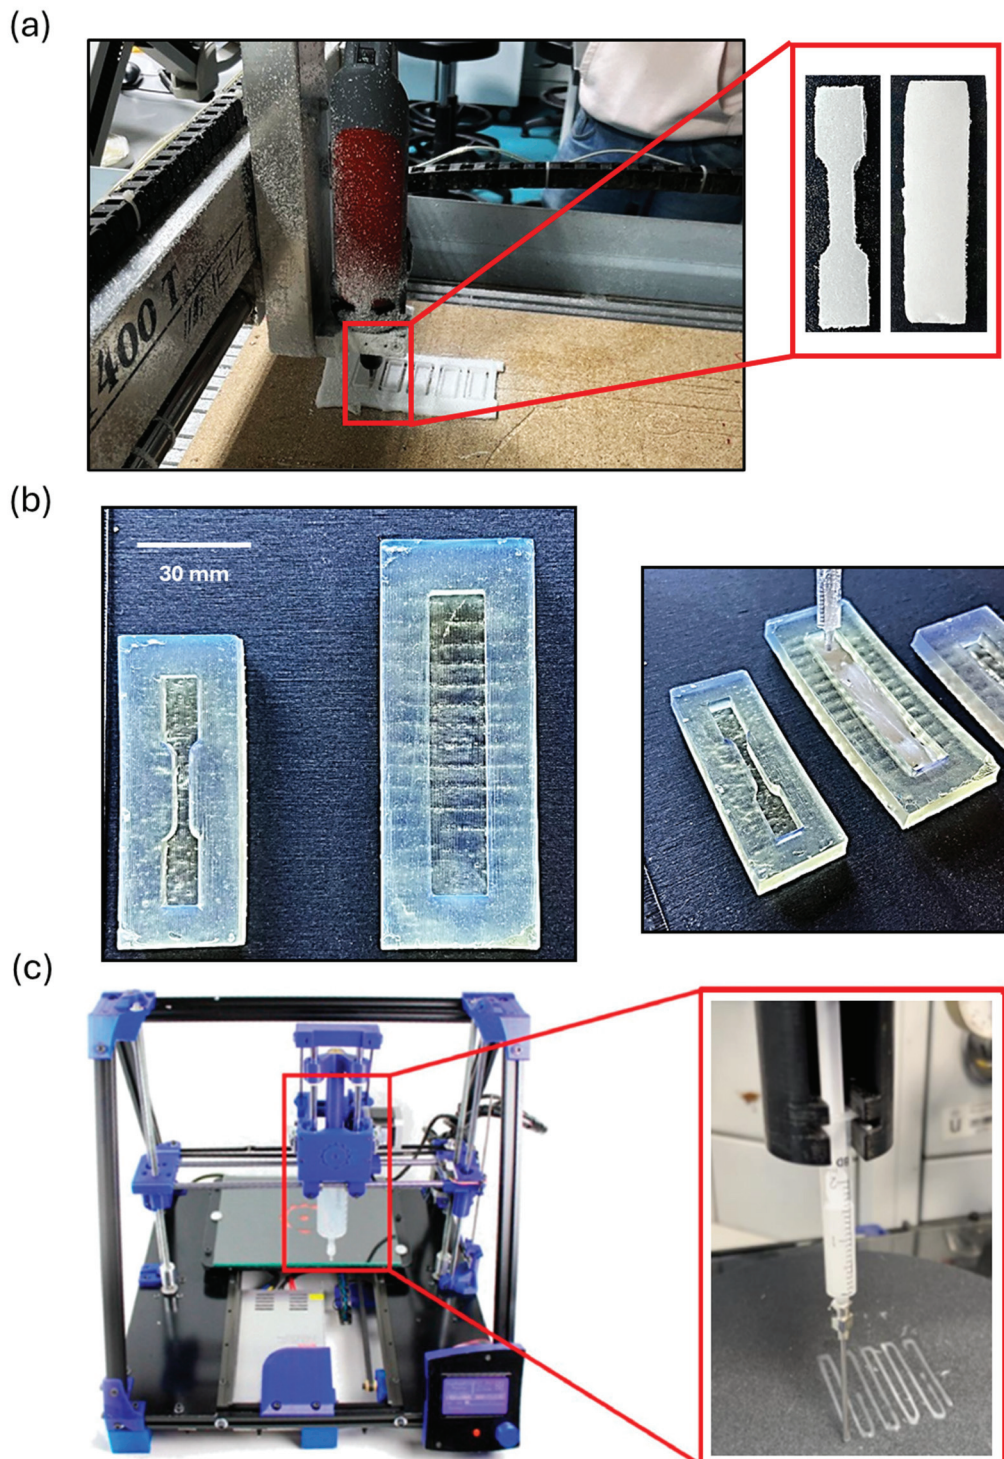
(a) CNC machining of the as-received EPS waste (EPS-0) (b) Molds obtained by SLA 3D printing technology and casting process using EPS-1, EPS-2, and EPS-3. (c) DIW 3D printing technology using a BCN3D Plus printer with a modified Paste Extruder Module.
